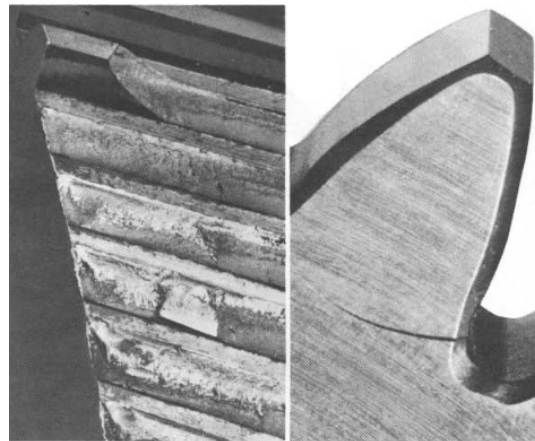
TOOTH FRACTURE IN A GEAR [17]
